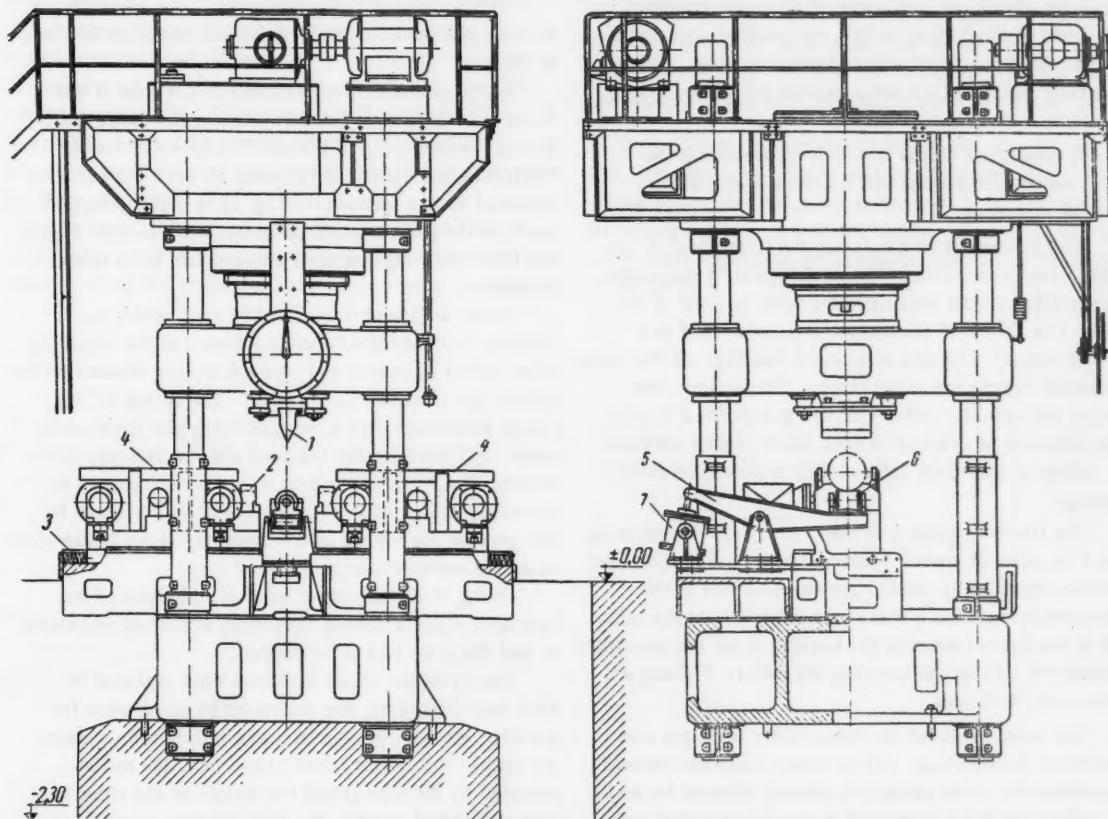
1500-ton hydraulic press after the modernization: 1) knife; 2) support; 3) spring; 4) guides; 5) lever; 6) shaped roller; 7) air cylinder.
